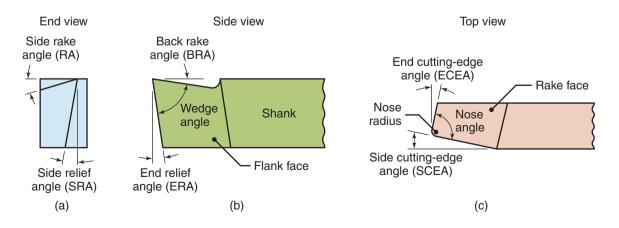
Designations for a right-hand tool. *Right-hand* means that the tool travels from right to left, as shown in Fig. 23.3b.
